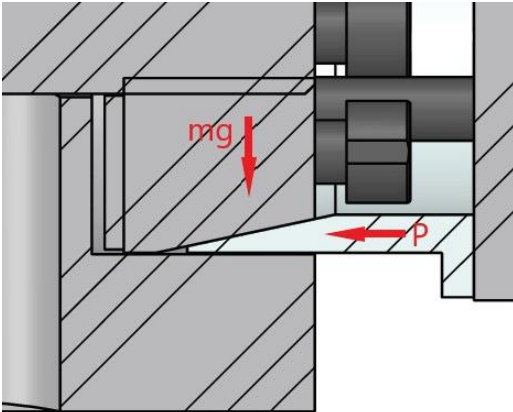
Section of the mating surfaces between conical sleeve and nut plate
